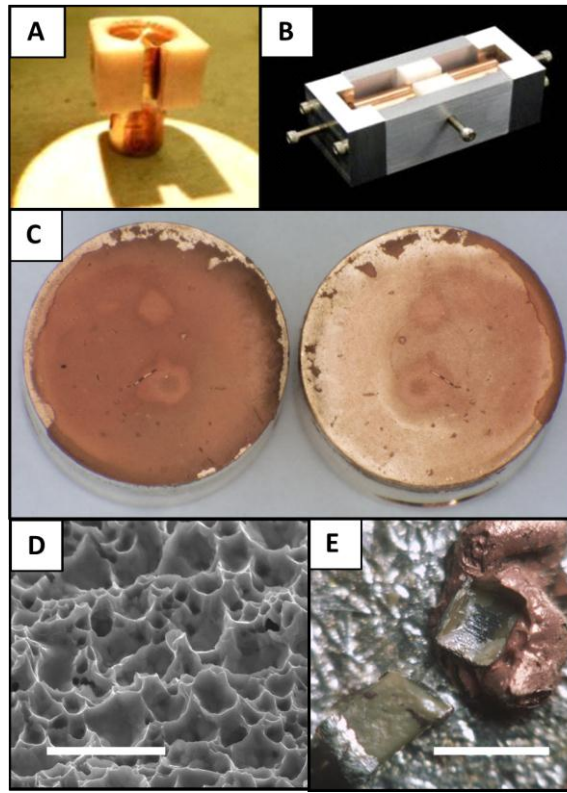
A) A single copper bar used for tensile testing is nested within a teflon collar. B) A tensile specimen loaded in a fixture ready for fusion. C) Photograph of a fracture surface following tensile testing. D) SEM image of a fracture surface after tensile testing. The scale bar represents 5 μm . E) A surface mount resistor bonded to a Sn surface with nanocopper. The resistor failed in the ceramic rather than the nanocopper when stressed. The scale bar represents 1 mm.
